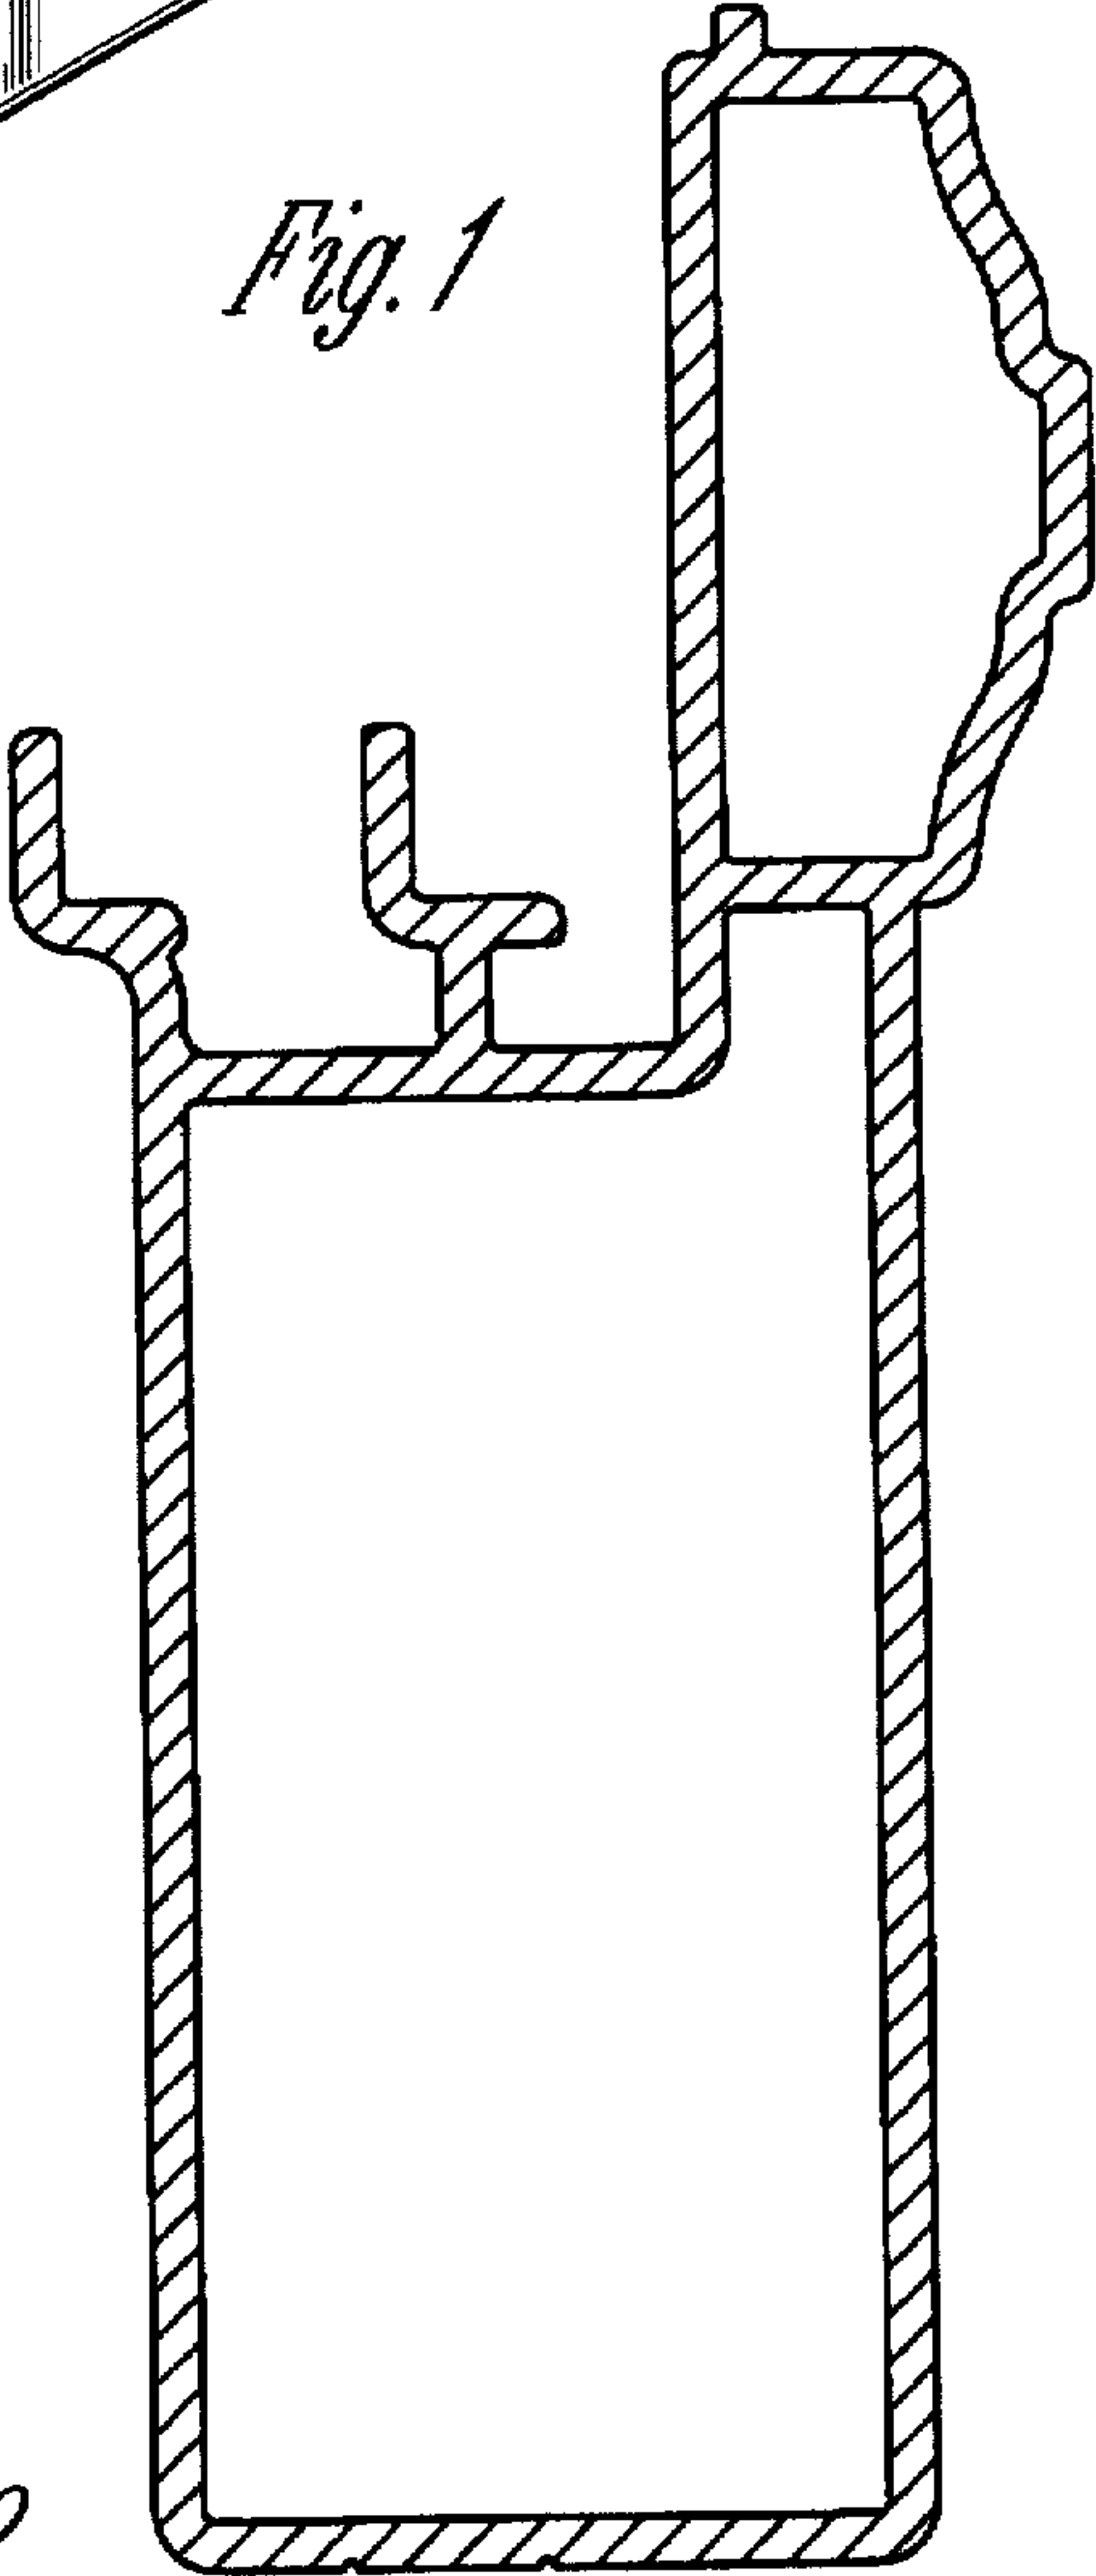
is a fragmentary perspective view of the door frame extrusion of the present invention;
